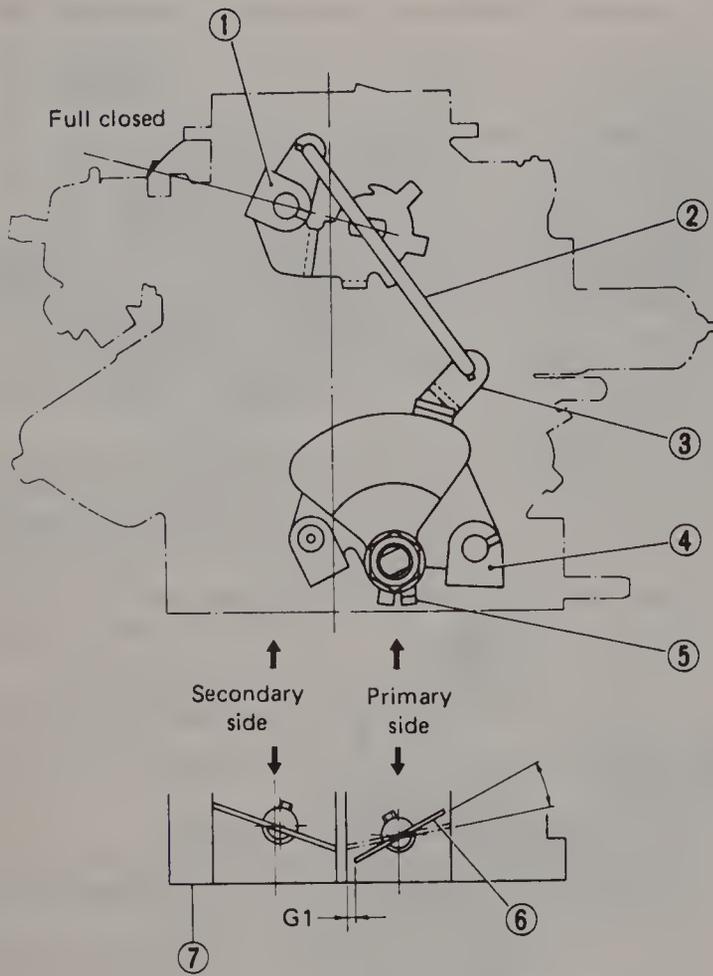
Fast idle opening adjustment (UK - Hitachi) (Sec 10)
